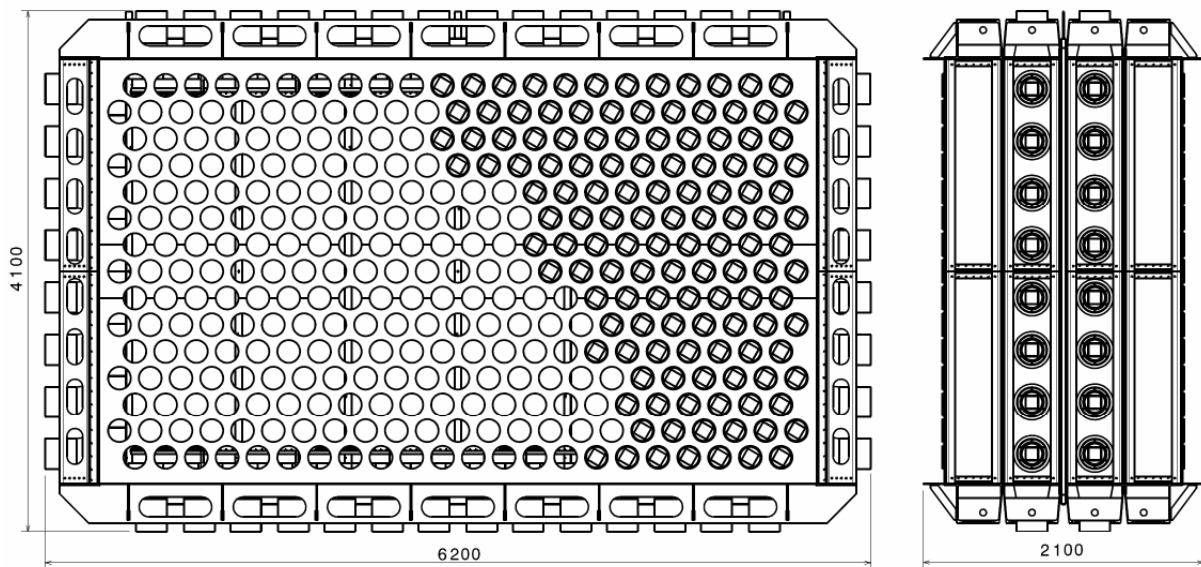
Conceptual design and outer dimensions of the Demonstrator module.
